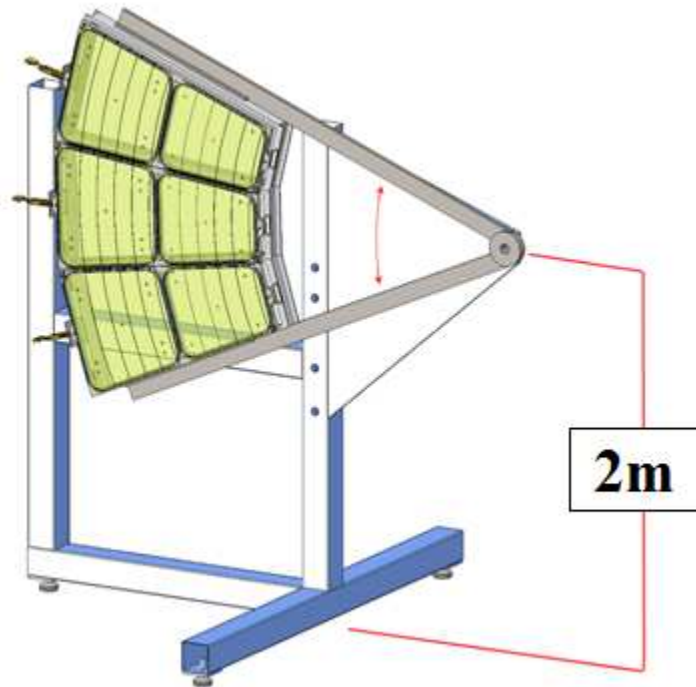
Concept Drawing of Ground-Test Membrane Fixtures
